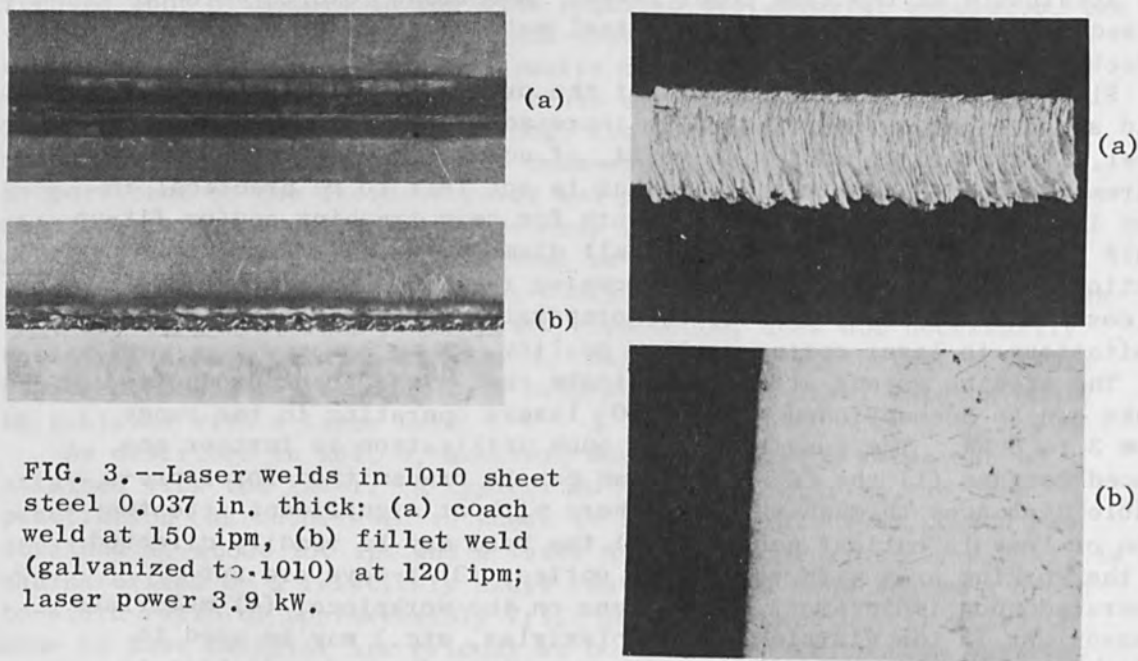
Laser welds in 1010 sheet steel 0.037 in. thick: (a) coach weld at 150 ipm, (b) fillet weld (galvanized to 1010) at 120 ipm; laser power 3.9 kW.
